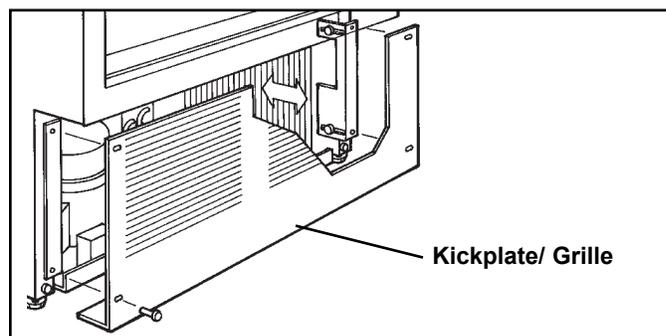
Model 427, 427R Kickplate/Grille Removal
